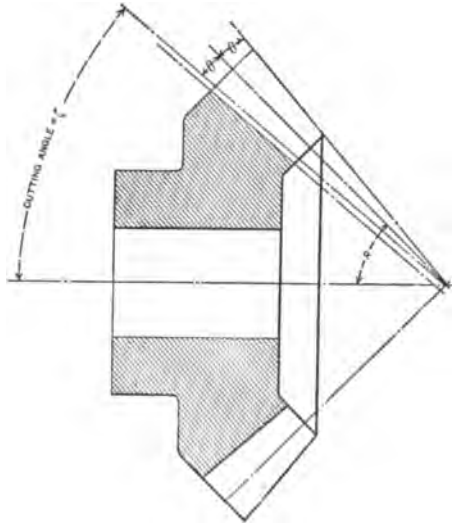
Cutting Angle and Parallel Clearance, Recommended by Brown & Sharpe for Bevel Gear Cut with a Formed Cutter
